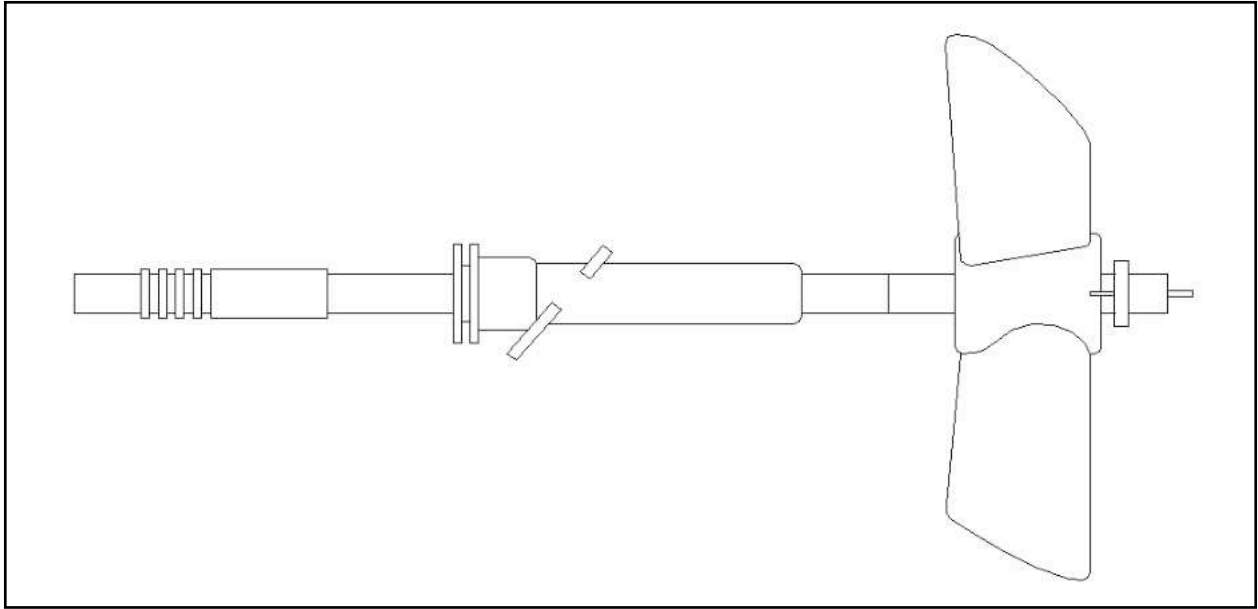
Schematic of propeller shaft and propeller (shaft bushing and strut removed).
